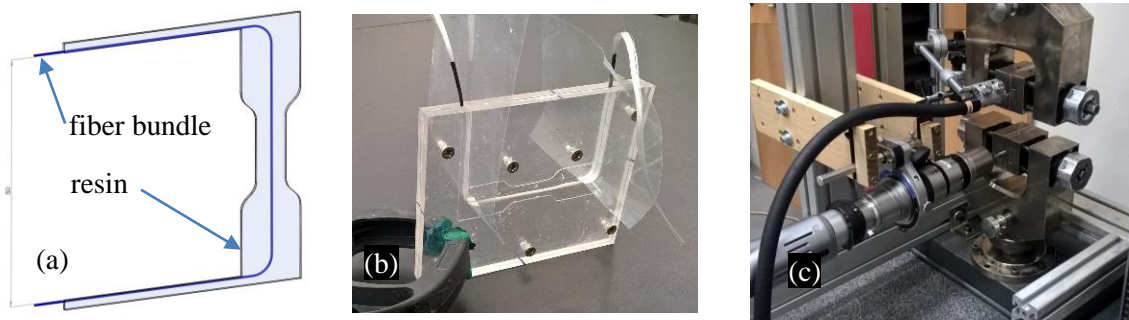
The geometry of the specimen (a), the mold (b) and the measurement layout (c)
